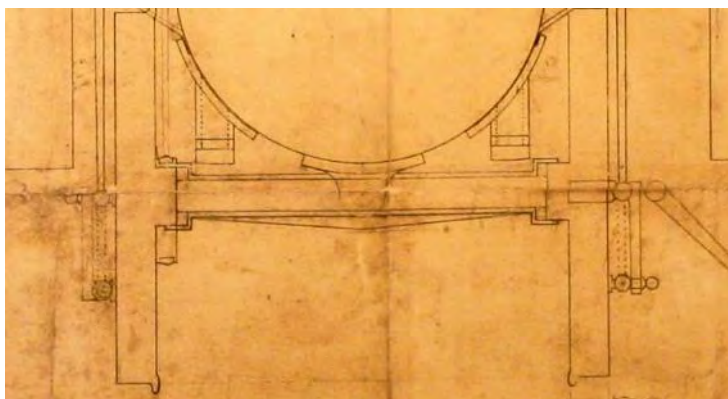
Cannon box bearing for the rear axle from early schematic drawing.
